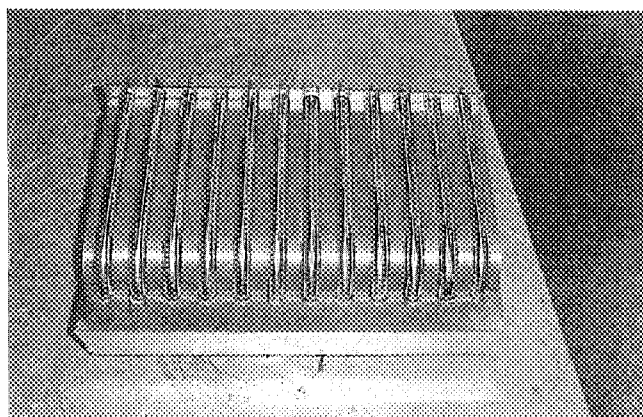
Assembly of SS backing plate, DSCu heat sink plate and SS cooling channel tubes before HIP process
